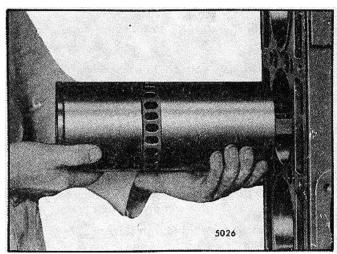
Installing Piston, Rod and Liner Assembly in Cylinder Block
